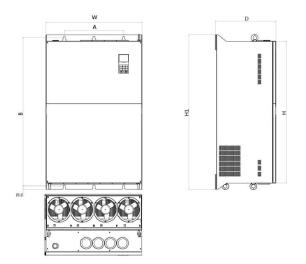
Schematic diagram of external dimension and mounting dimension of SN200G metal plate structure
